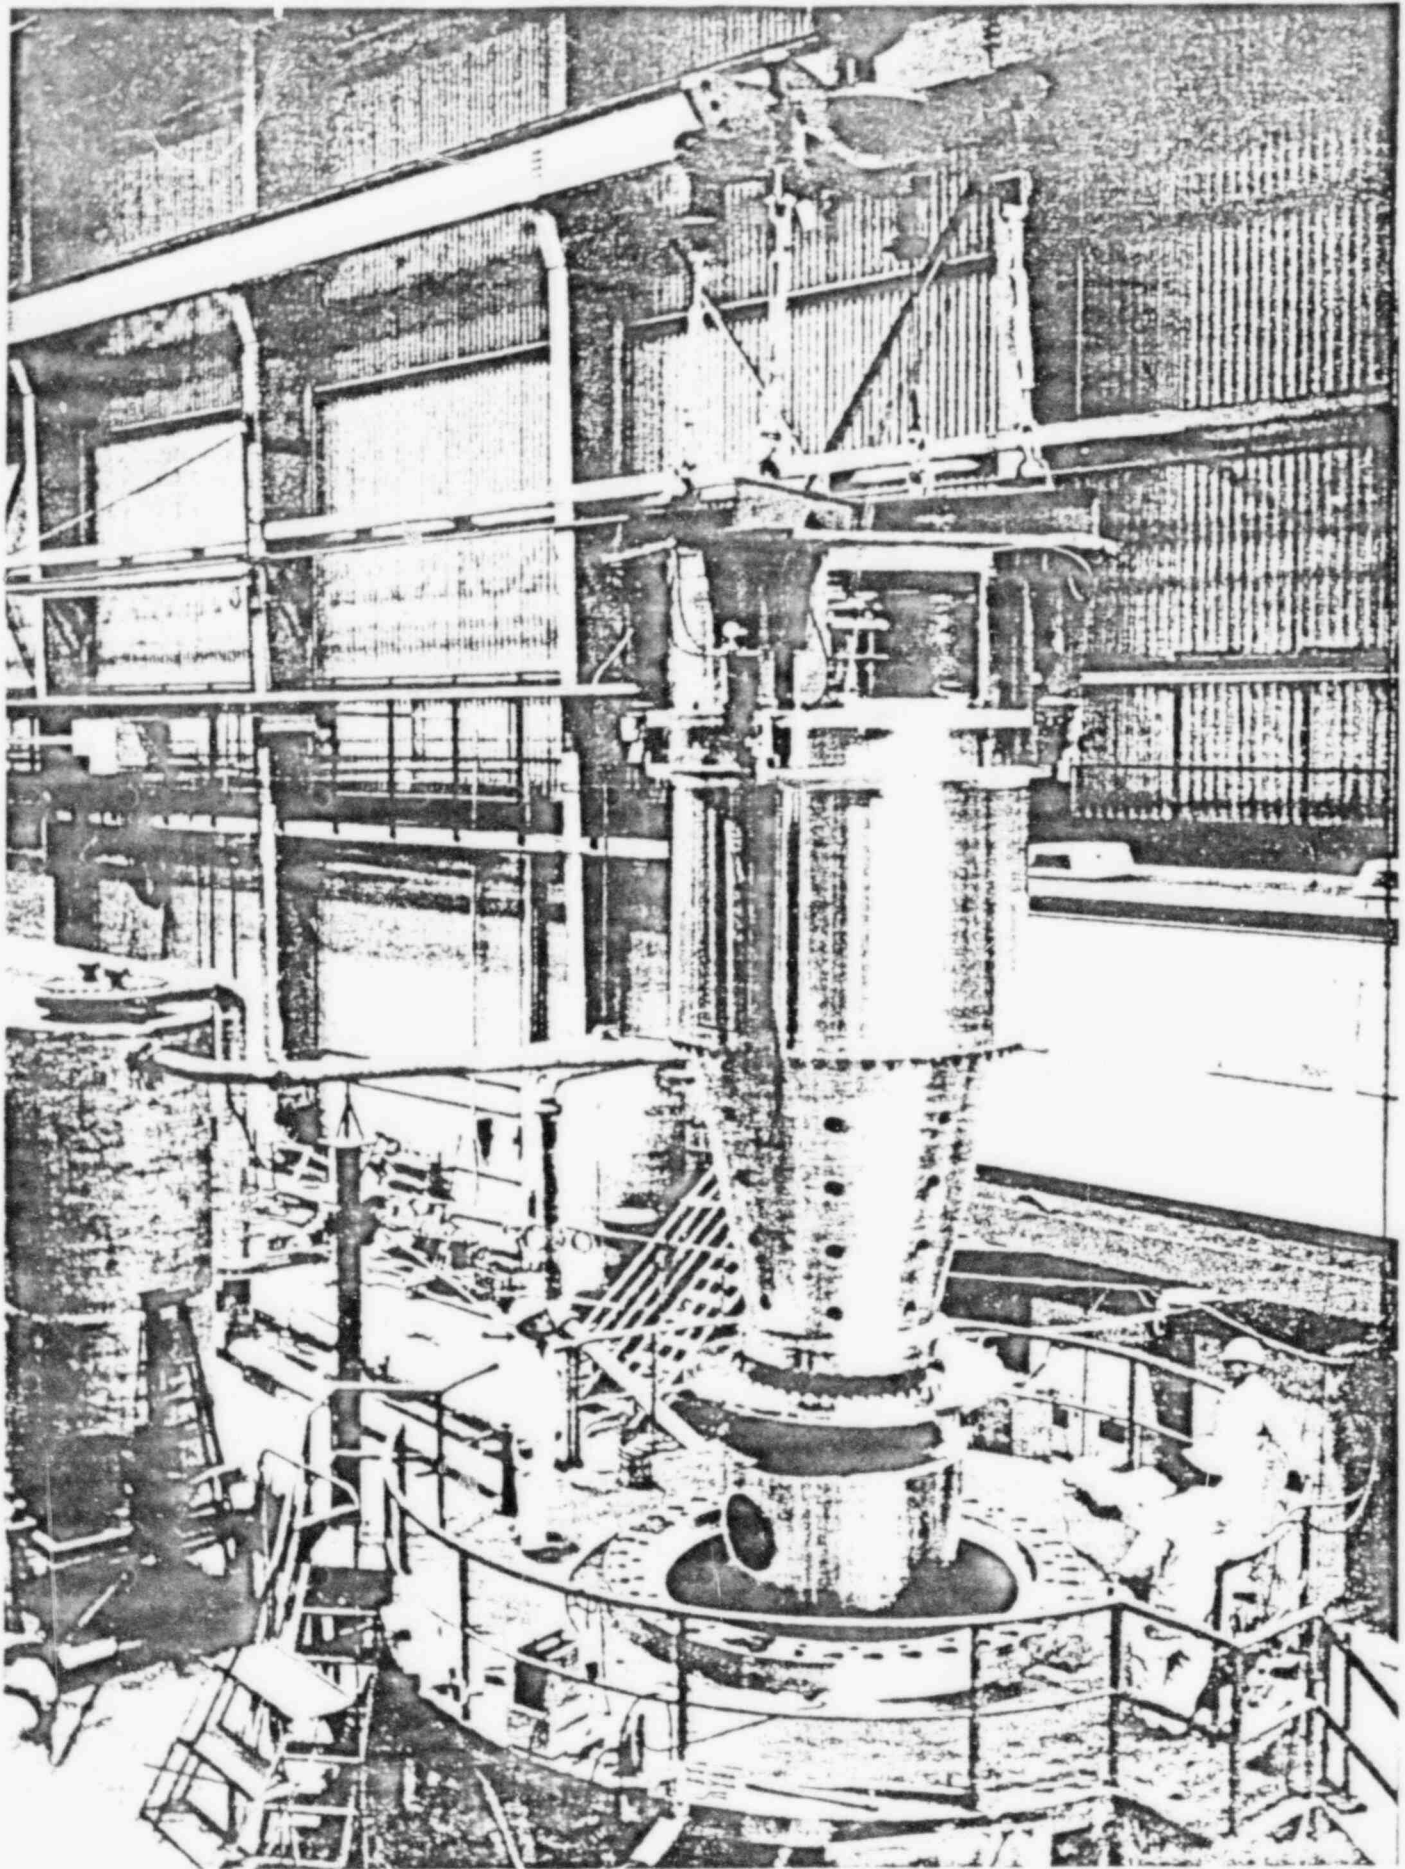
Prototype Primary System Sodium Pump Being Assembled.
